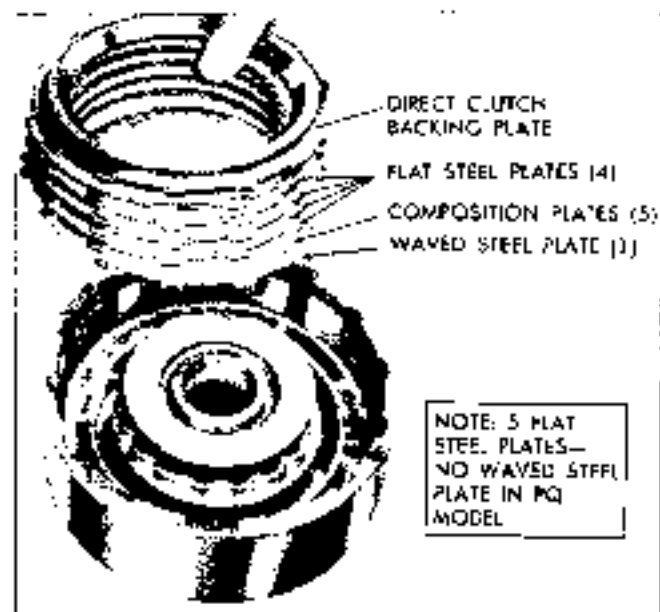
C-101 Installing Direct Clutch Backing Plate, Composition Plates and Steel Plates
